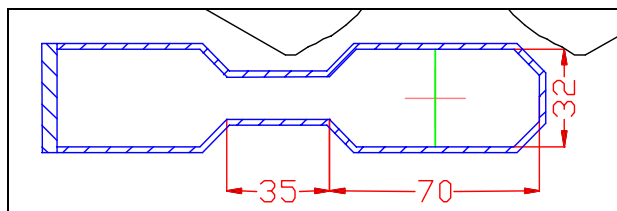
Cross section of the vacuum chamber within a quadrupole.
